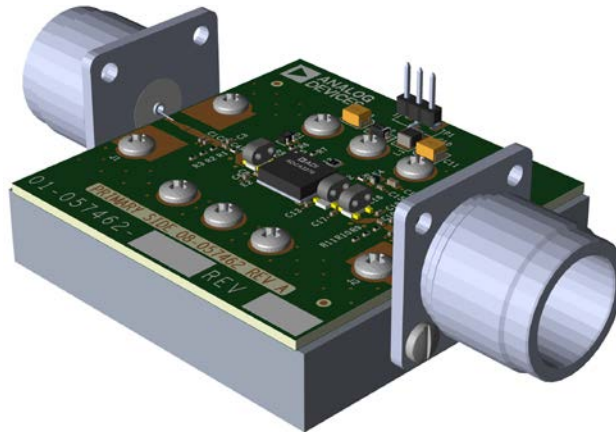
ADCA3270-EVALZ Top Side, Fully Assembled
